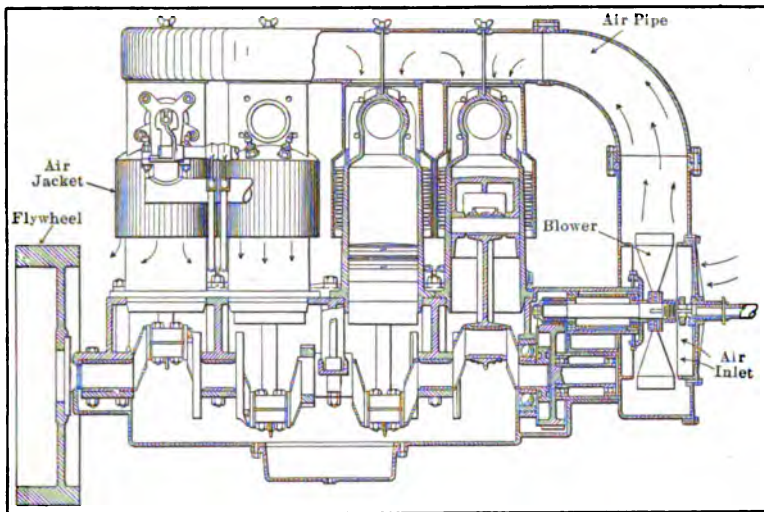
Air-jacketed Frayer-Miller engine used in Kelly trucks. Cooled air currents directed over cylinders by positive air-blower system.
